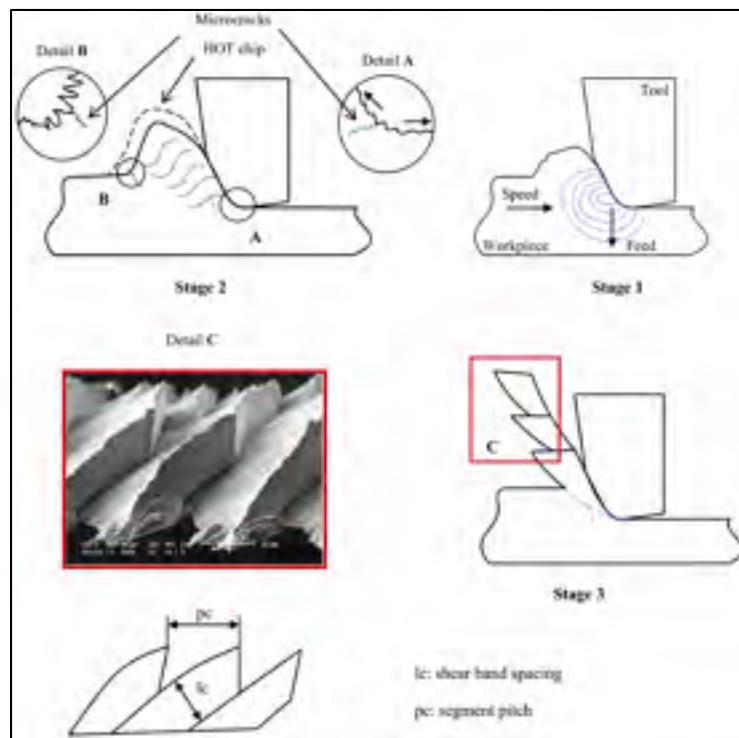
Segmented chip formation during turning of hardened AISI D2 steel (60-62 HRC) using PCBN tool (Jomaa et al., 2011)
